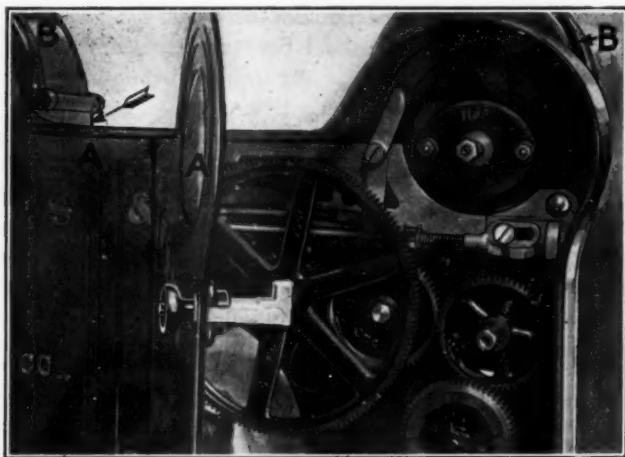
INTERLOCKING DEVICE FOR DOOR PROTECTING HEAD GEARING OF SPINNING FRAMES (PAT.)
